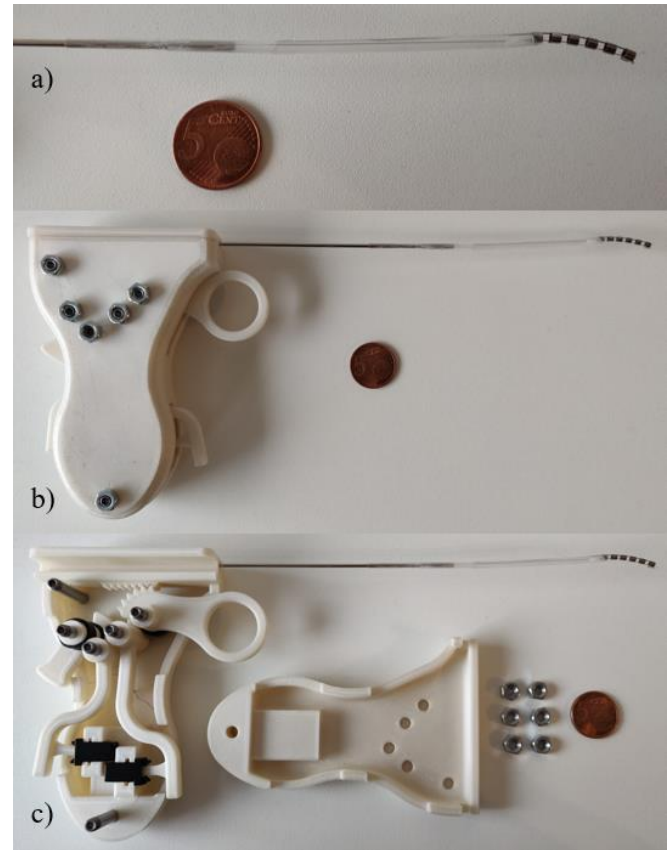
The prototype shaft assembly (a), the assembled prototype (b), and the prototype without the front casing part and nuts to show the inner components (c).
